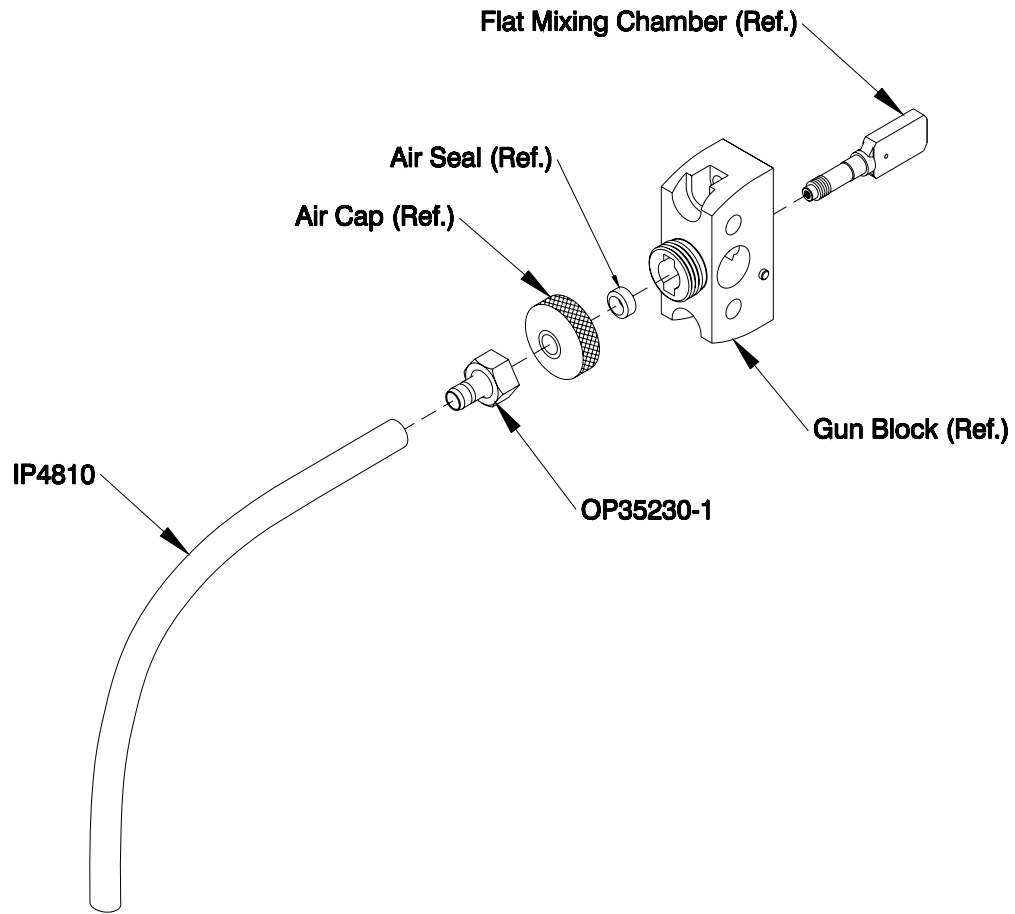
Pour Package Assembly (Part No. OP35230-1-PKG), Exploded View
